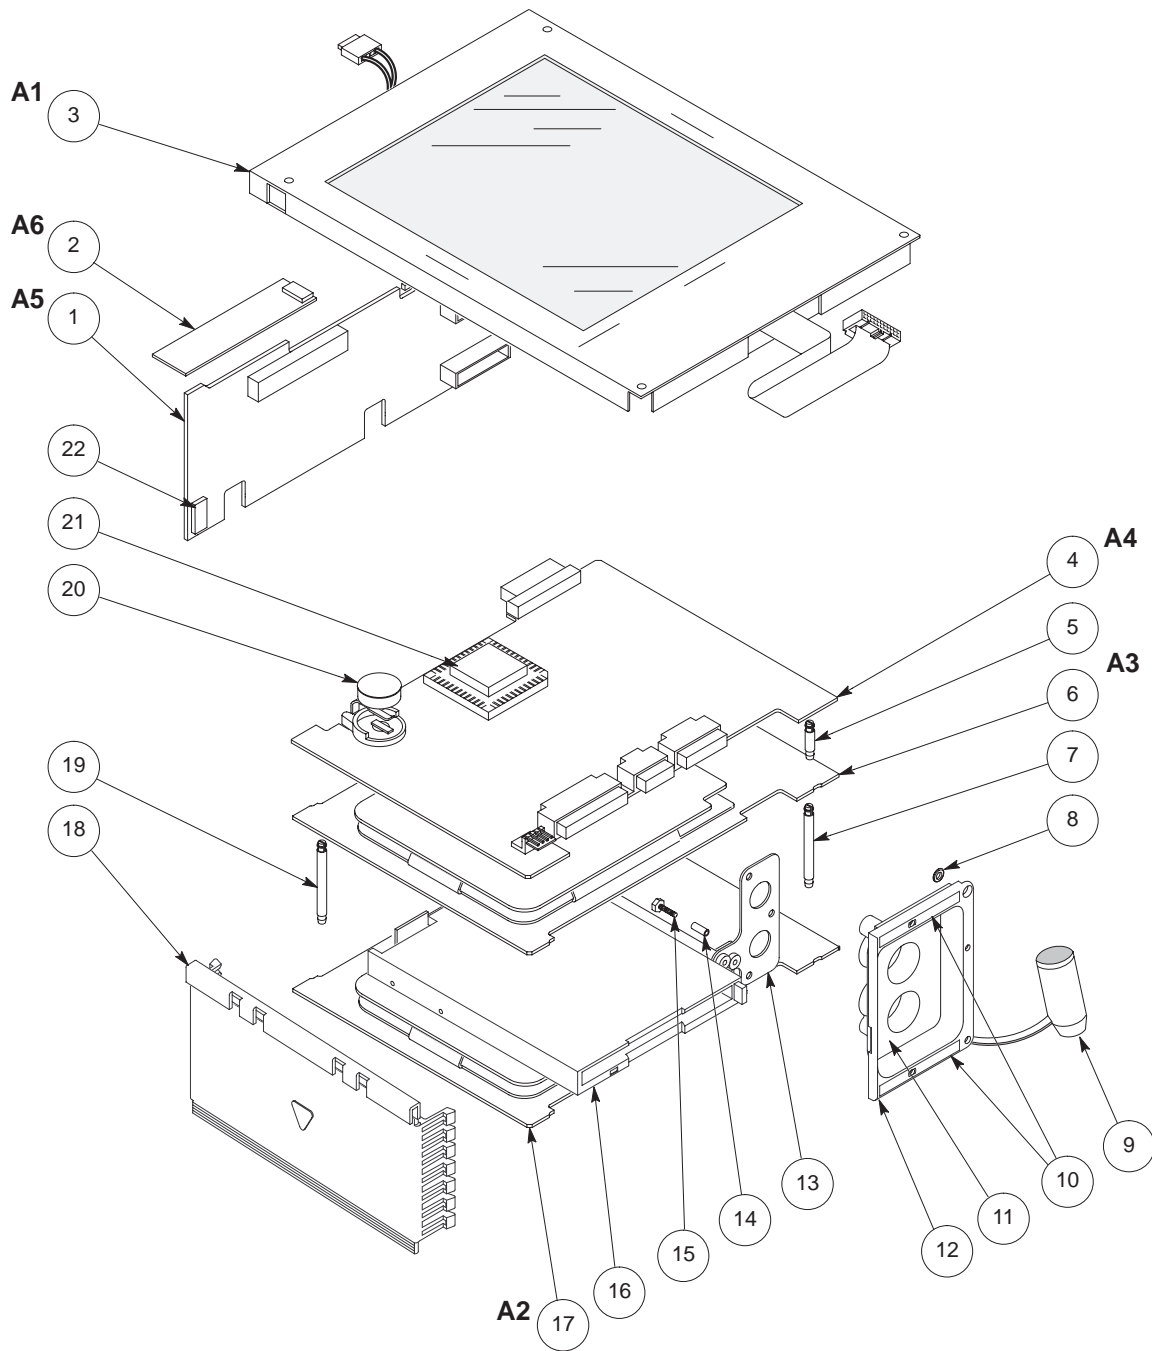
Opto-Electrical Assemblies: Dual Port
